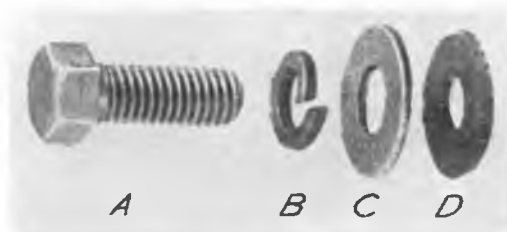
Bolt and washer assembly. A— $\frac{3}{8}$ " x 1" bolt; B—lock washer; C—plain steel washer; D—special rubber washer.
